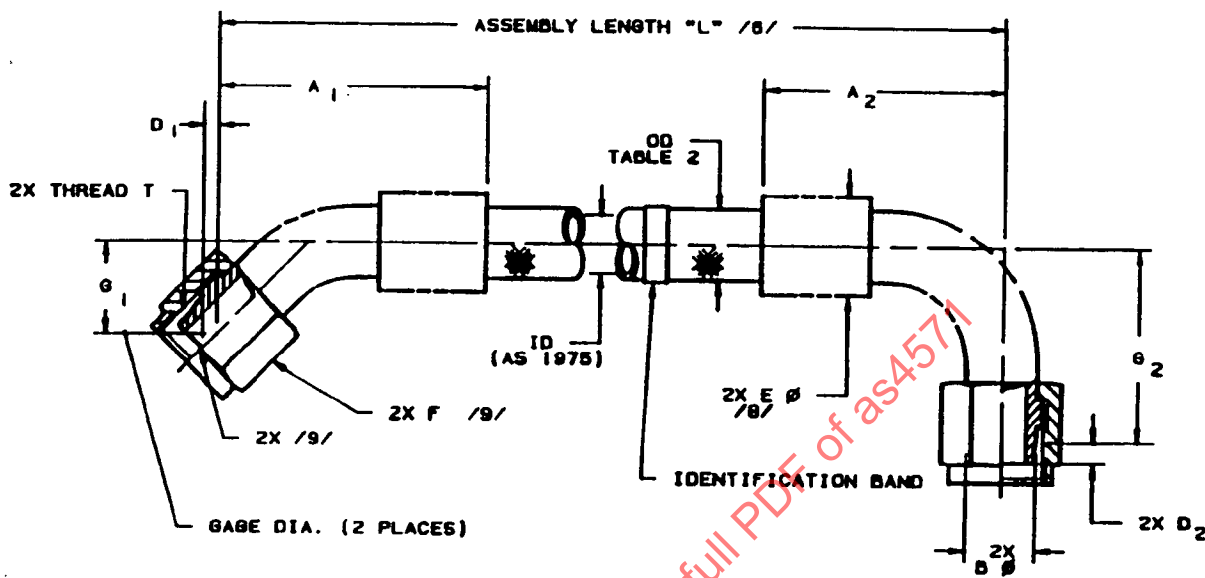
HOSE ASSEMBLY, 45° ELBOW TO 90° ELBOW
